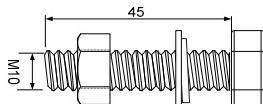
Dimensions of Fastener Set for Metal Frame(unit: mm)
